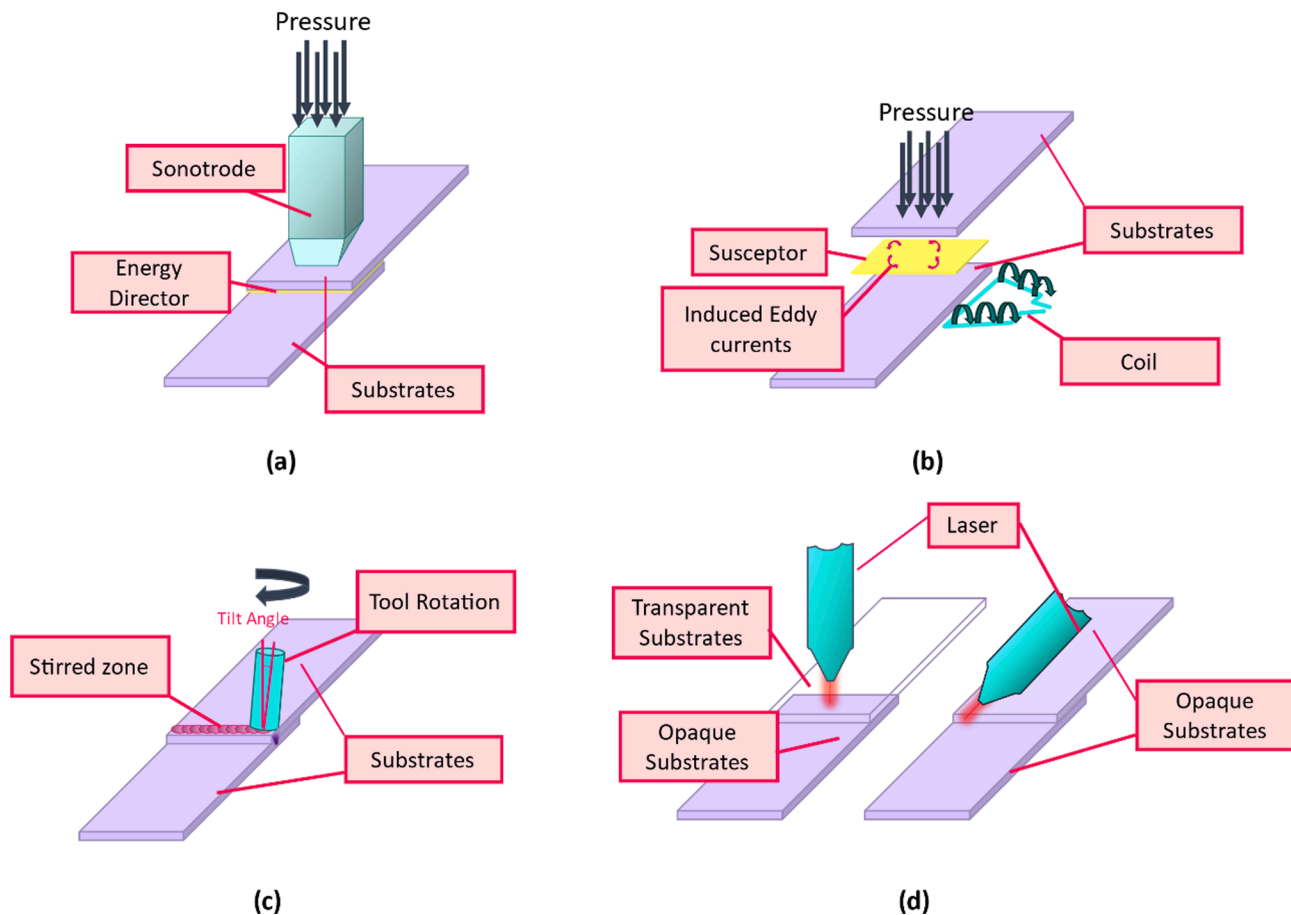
Typical approaches of welding technique including a) ultrasonic welding, b) induction heating joining, c) friction stir welding, and d) laser welding.
